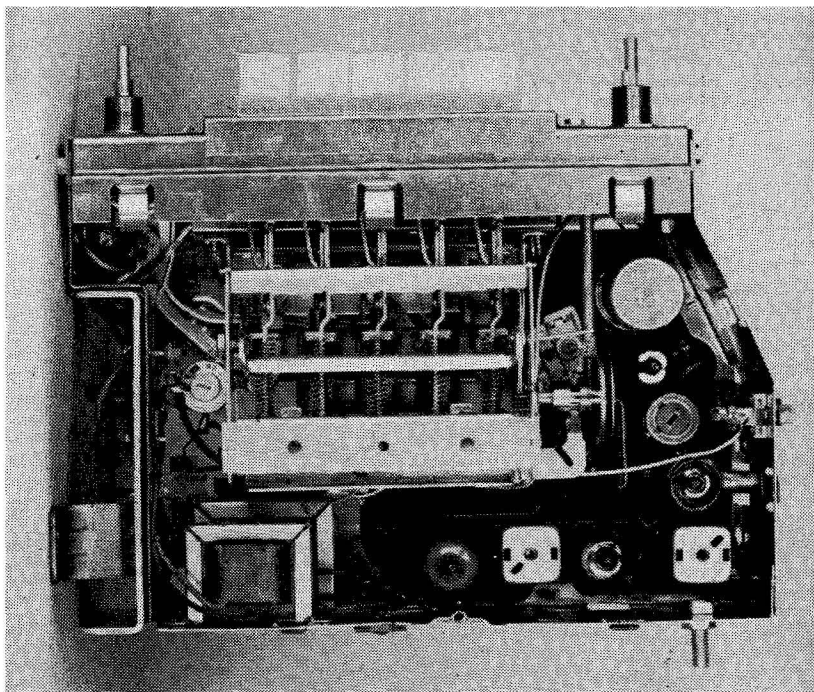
Interior top of chassis view of the BENDIX Model R84BF car radio.
